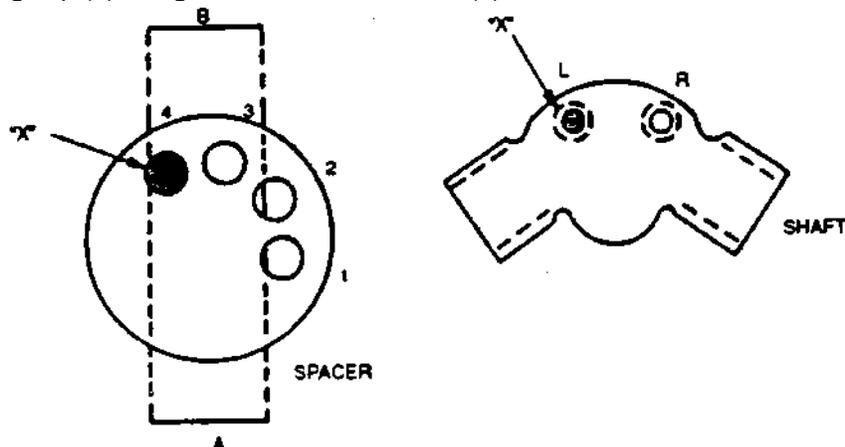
Disassembly of Throttle Shaft Assembly
